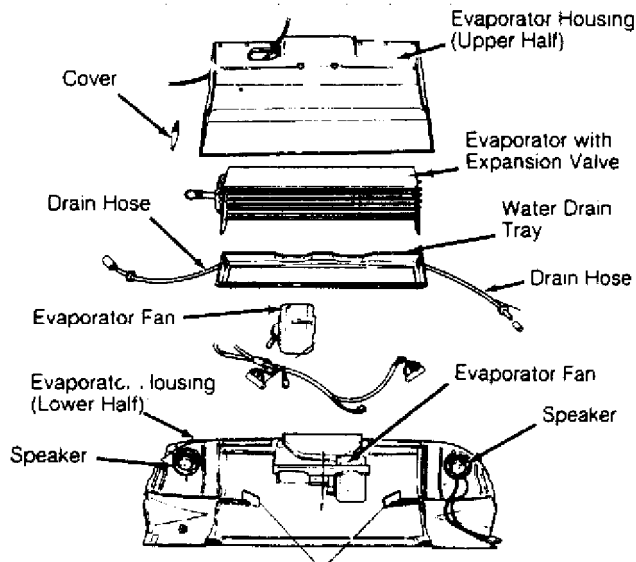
Exploded View of Evaporator Assembly (Vanagon)
